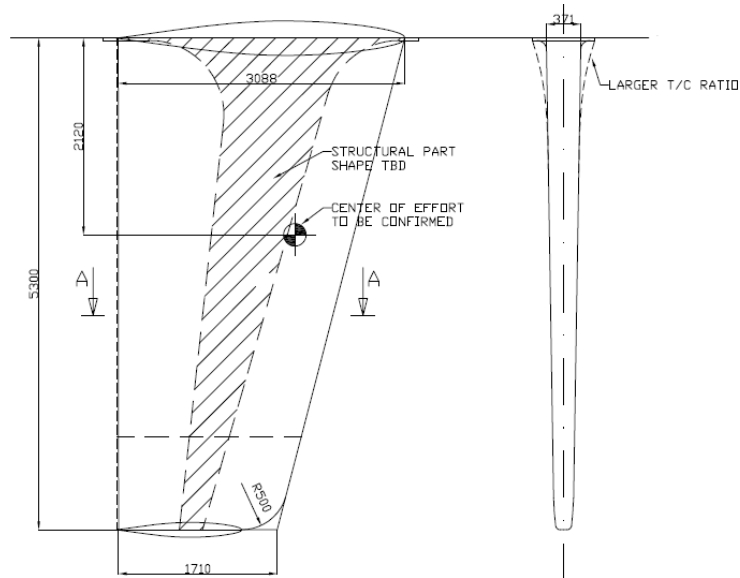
The main dimensions of the neutrally buoyant centre board, which will be used as a reference for designing the centre boards that will be tested.
